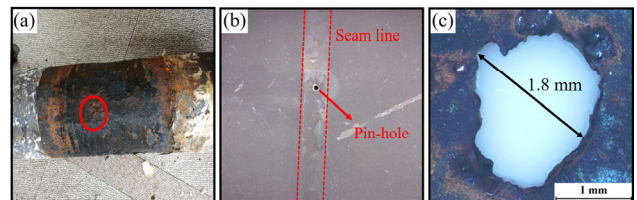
(a) Corroded heat-transport pipe (Red circle: pin-hole position), (b) inner surface of the pipe with a pin hole in the seam line, (c) a pin hole with a diameter of 1.8 mm (outside view).
